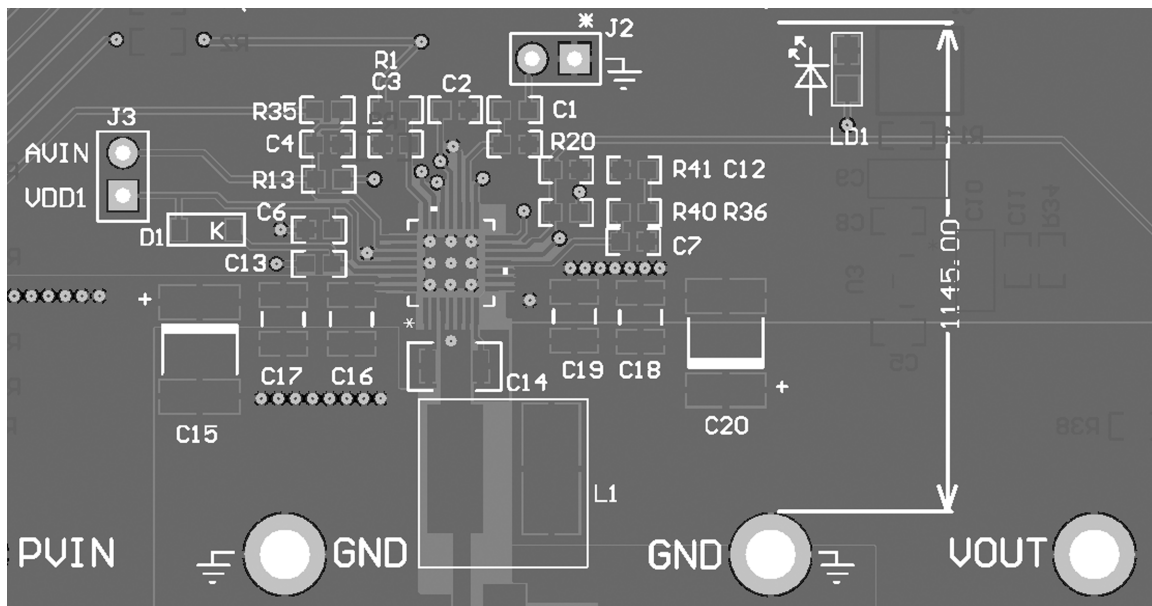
PCB Layout Example: Top Layer and Silk Screen
